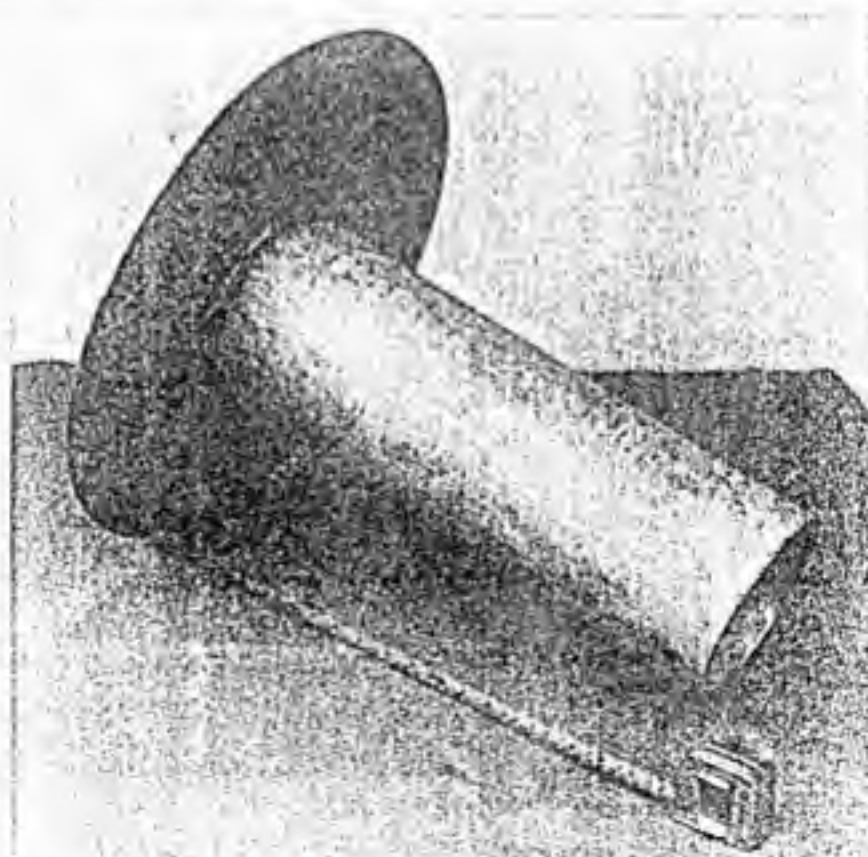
The fuel tube and circular top plate of the generator unit.
